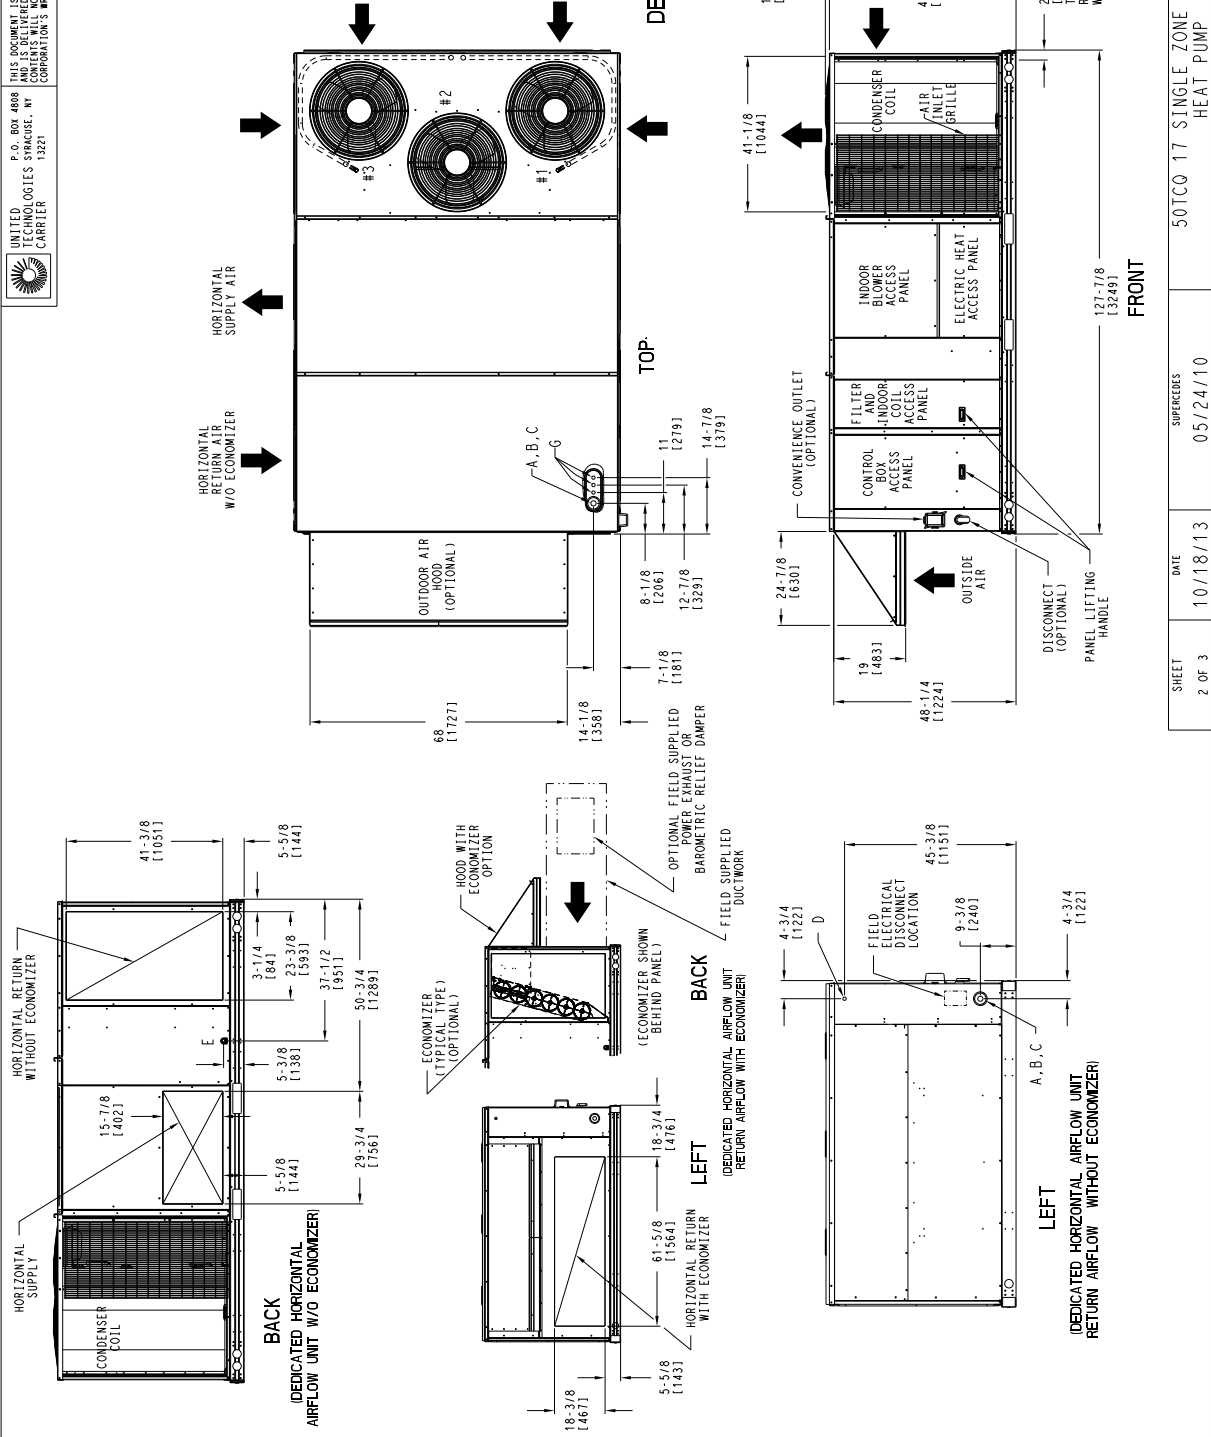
Unit Dimensional Drawing - Size 17 Units, Sheet 2 of 3
